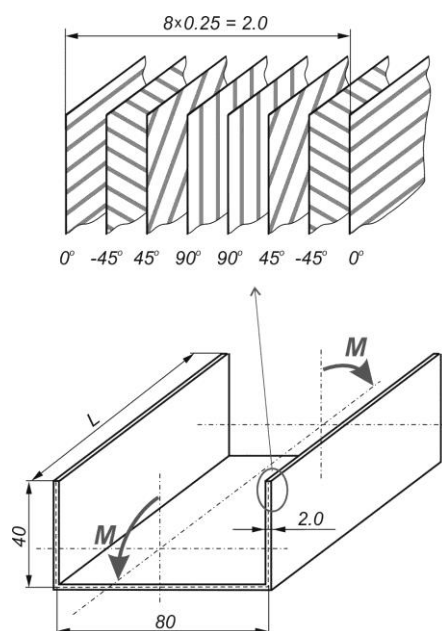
Load, dimension and exemplary ply arrangement of considered channel section beam
